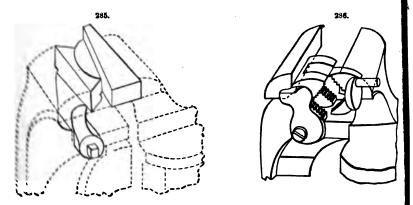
represents Stephens' adjusting taper attachment, for holding all kinds of taper or irregular work; and Fig. 286 illustrates the pipe attachment for holding get The width of jaw varies from 2 to 61 in.; opening, 21-11 in.;
